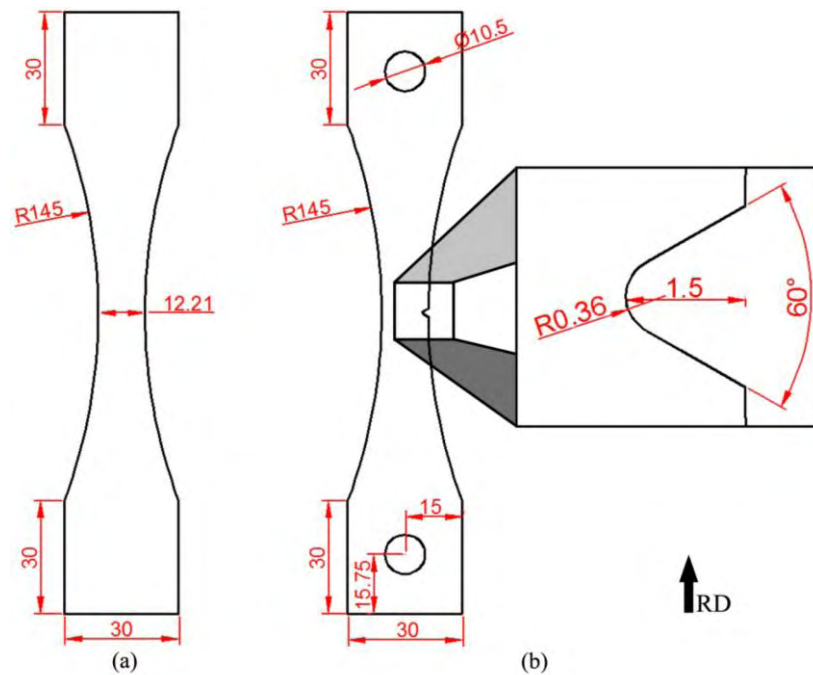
Geometry of (a) smooth and (b) notched fatigue test specimen (dimensions in mm).
